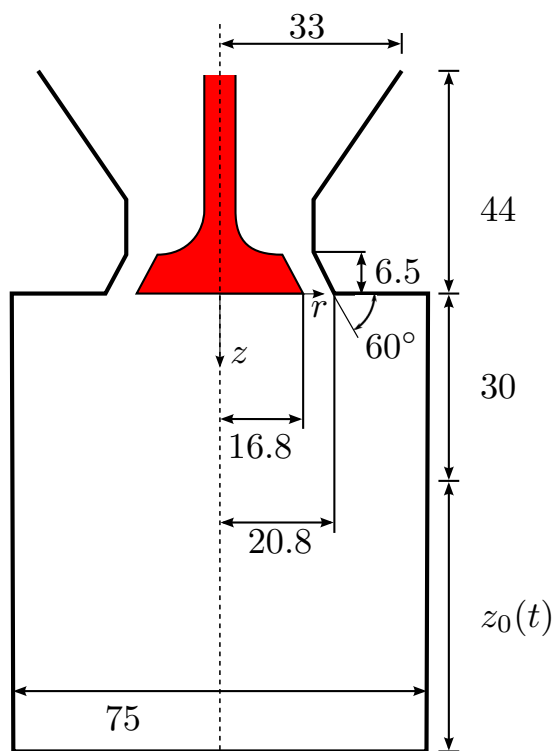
Schematic of the valve/piston assembly (all measures are given in mm).
